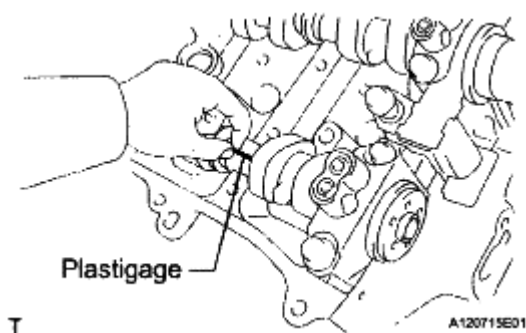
Laying Strip Of Plastigage Across Each Of Camshaft Journals
